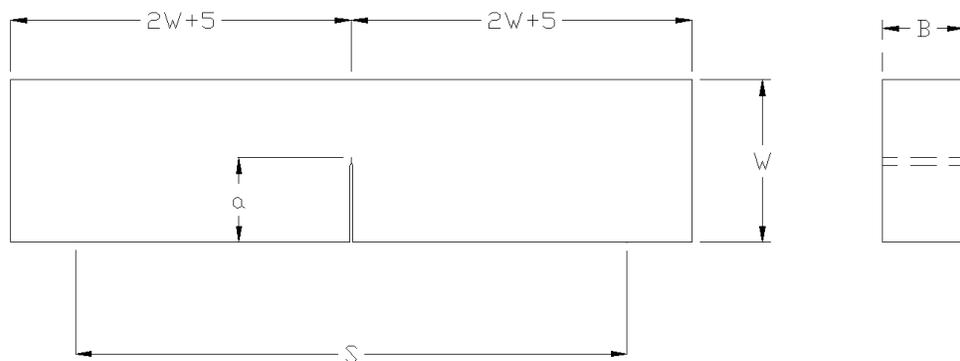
Single Edge Notched Bend Specimen – Standard Proportions and Tolerances according to ASTM E399 – 90 Standard Test Method
